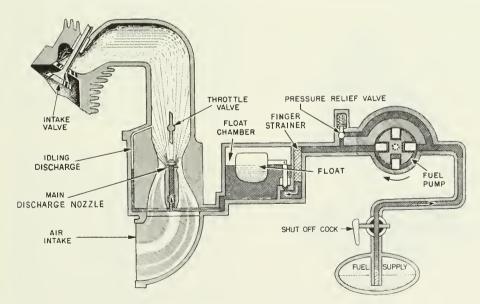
A typical aircraft fuel system showing how the gasaline is pumped fram the fuel tank into the carburetor float chamber, drawn
